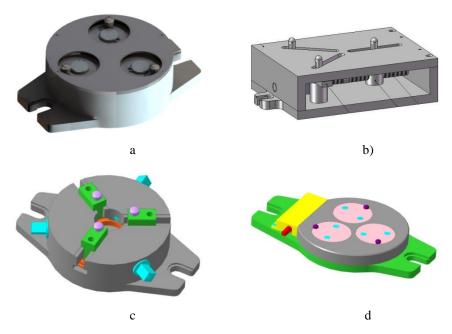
Adjustable locating modules for setup of prismatic parts according to the plane.
